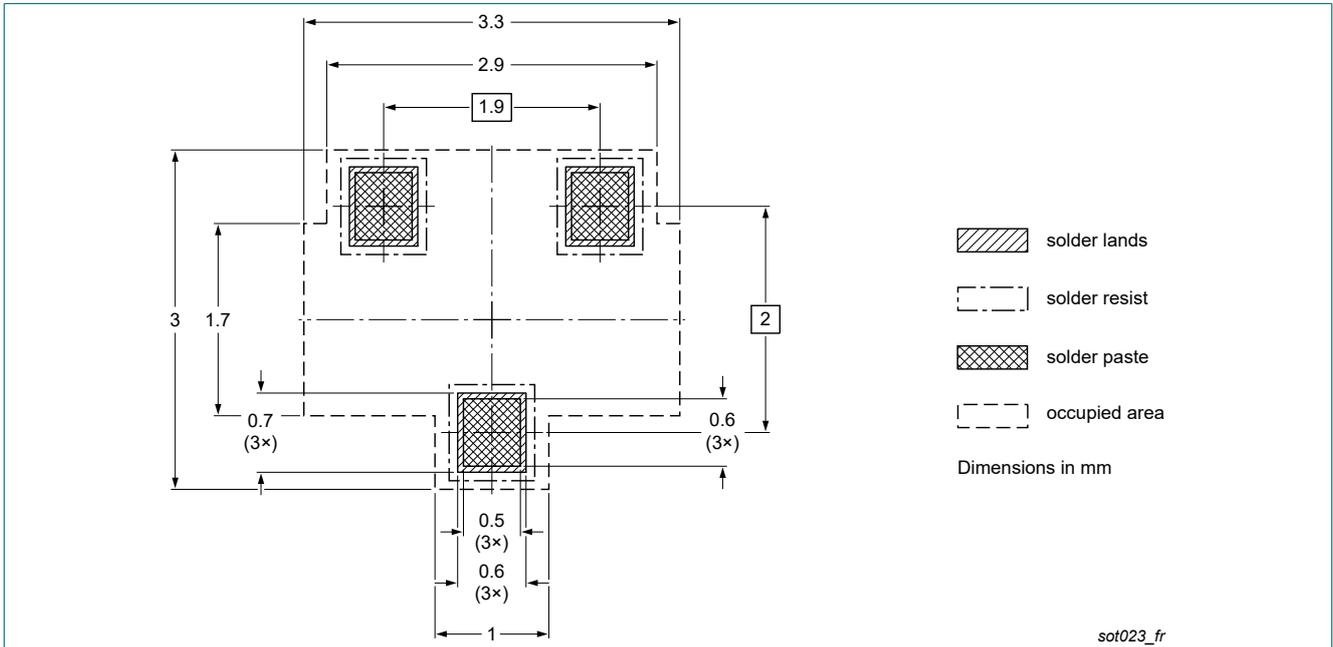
Reflow soldering footprint for TO-236AB (SOT23)
